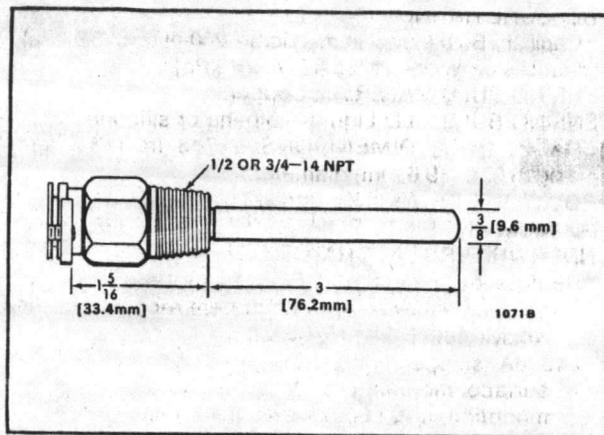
BOILER FITTING AND BULB DIMENSIONS FOR L4006C AND L6006B.
